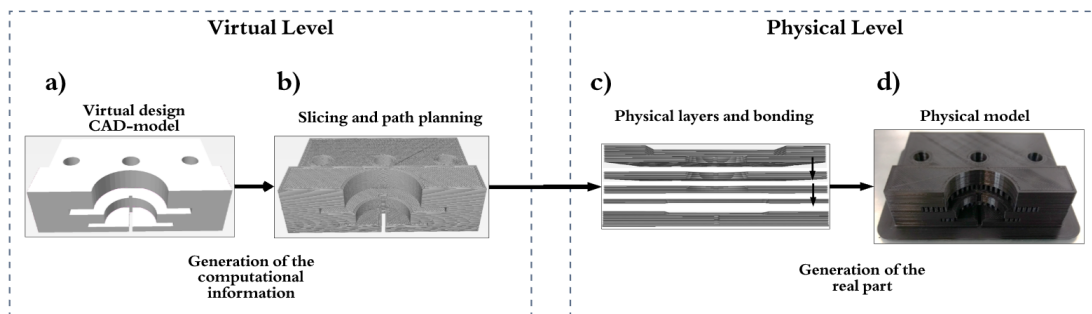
The process chain on additive manufacturing; a) CAD-model, b) slicing & path planning, c) physical layers & bonding, d) physical model
